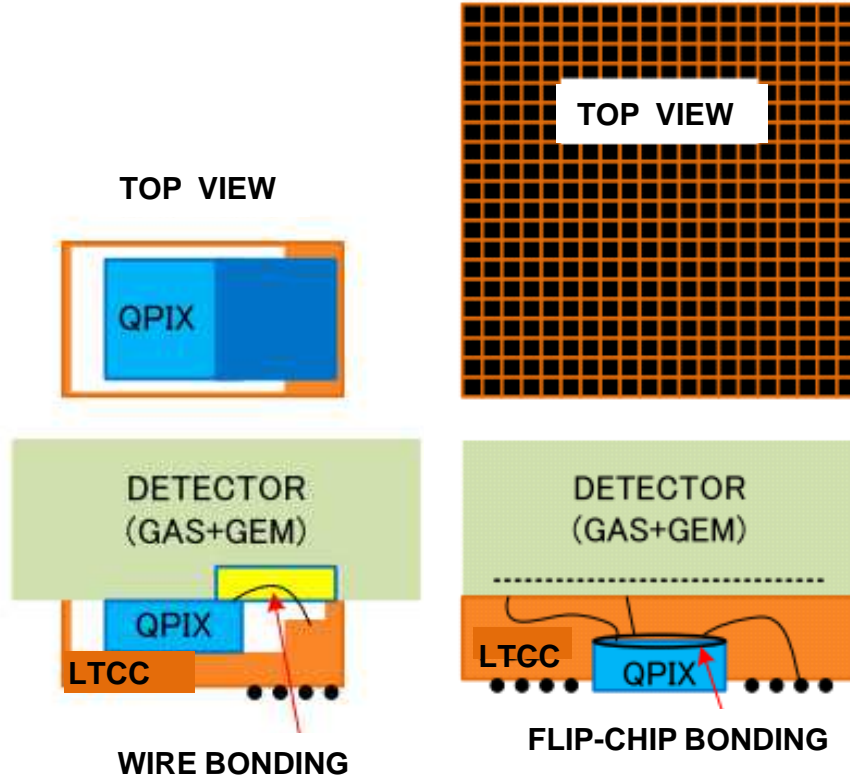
Two ways of QPIX mounting. The left panel shows a wire-bonding mounting and the right shows a flip-chip mounting.
